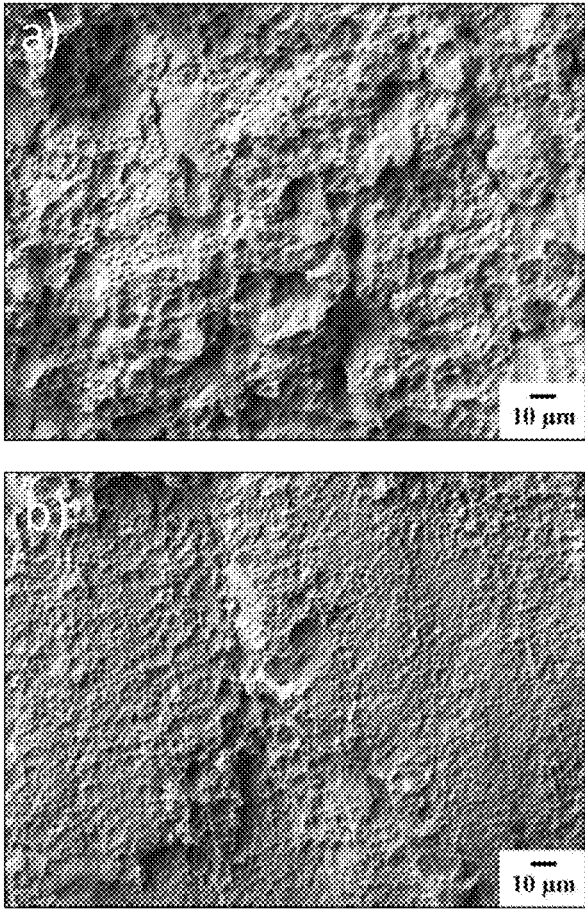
SEM images of the fracture surface in the Sample 2 from Alloy 2 with a notch of 6 mm in diameter; a) in the center of the fracture cross section, b) near the edge of the fracture cross section.
